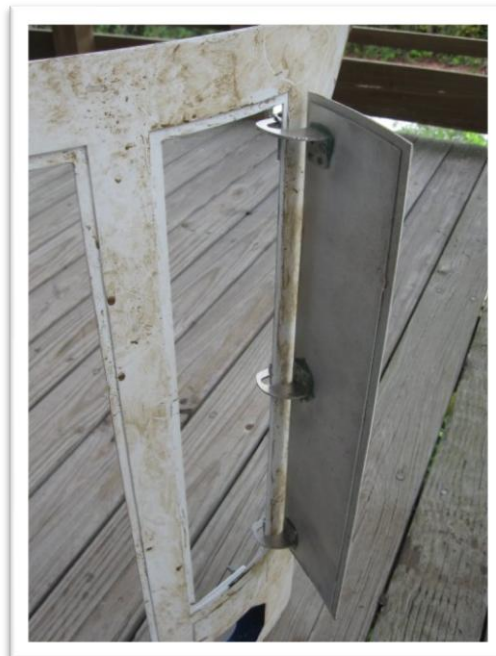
Back door (outside view) hinged with Robart hinges - Photo by: Chip Luck
